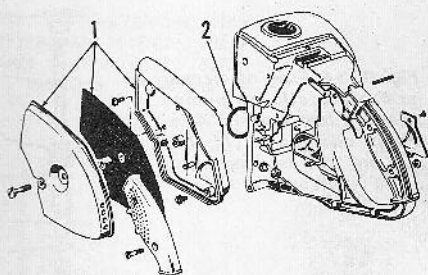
Exploded view of fuel tank, air box and rear handle typical of early models. Carburetor and reed valve are attached to the handle casting and casting is sealed to crankcase by "O" ring (2). Several variations of the air intake and filter (1) have been used.
